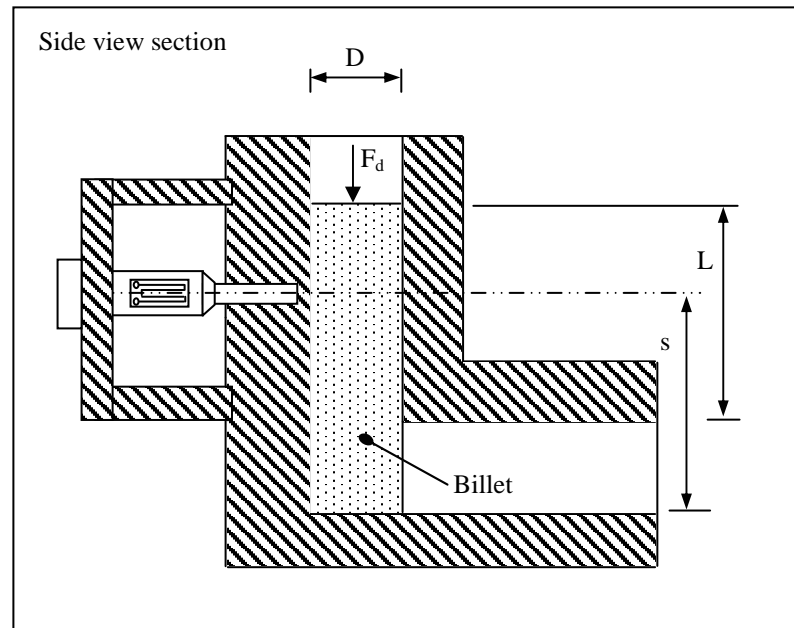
Sketch of the Side Pressure Measuring Device (side view section)
